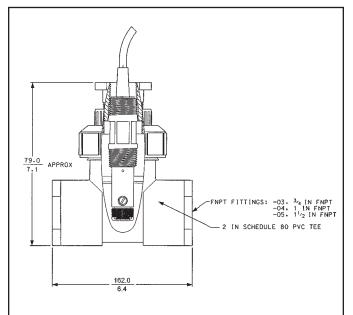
2 in. tee with ¾, 1, or 1½ in. threaded process connections (PN 915240-03, -04, -05 respectively) shown with a Model 499A amperometric sensor. The tee assembly is offered with a sensor mounting adapter that allows the user to remove the sensor without twisting the cable.
